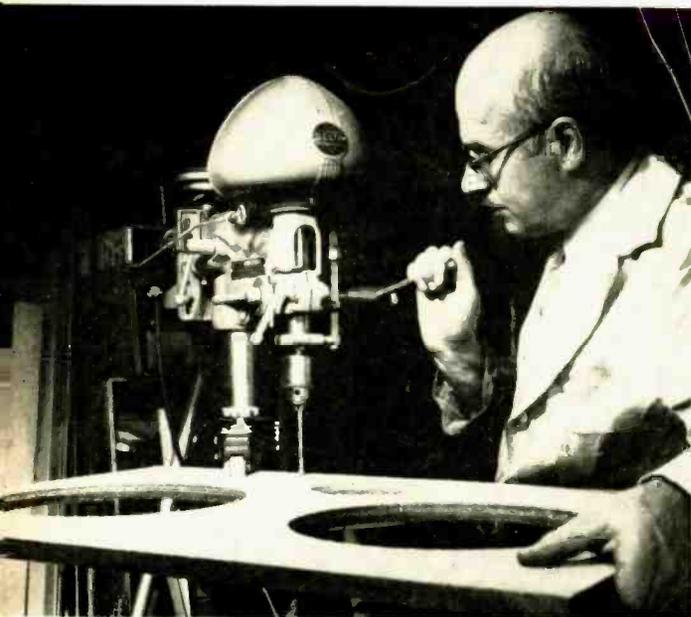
Delta drill press drives steel drill into Chemstone baffle to locate holes for bolts used to secure it to framing of enclosure.
